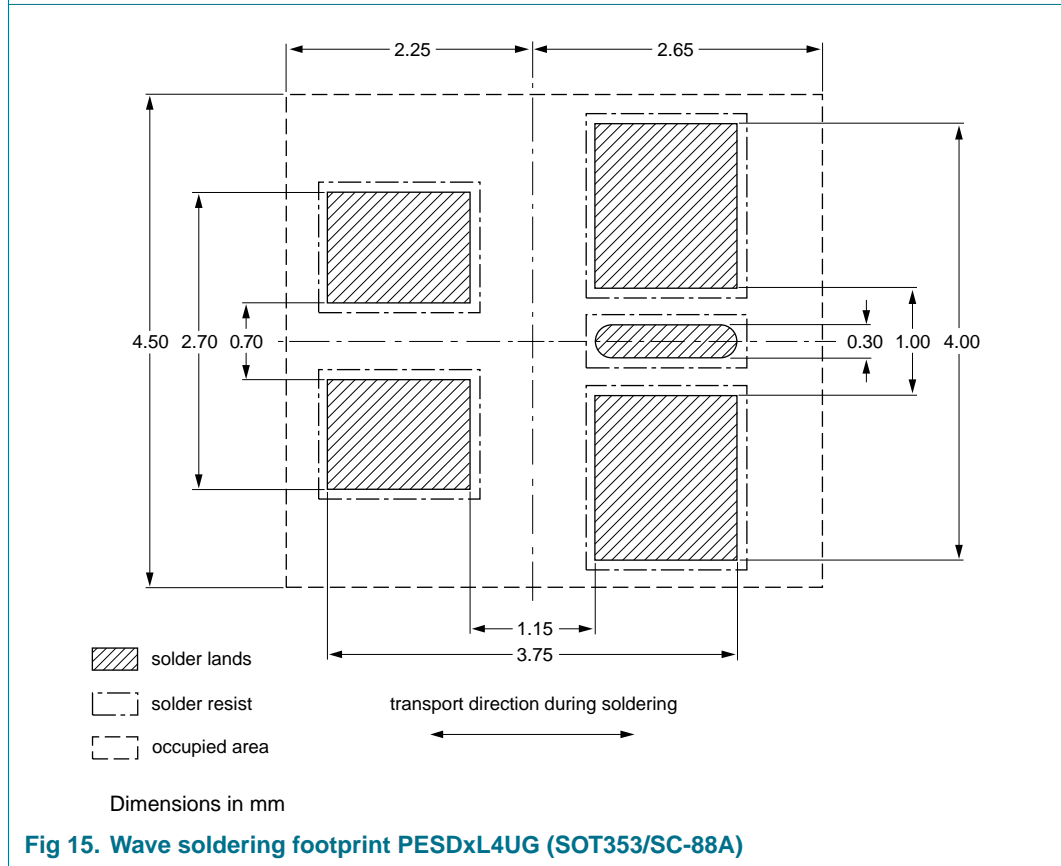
Wave soldering footprint PESDxL4UG (SOT353/SC-88A)
